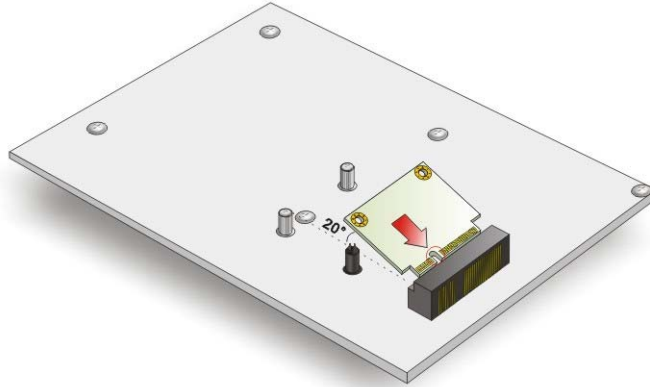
Insert the Half-size PCIe Mini Card into the Socket at an Angle
